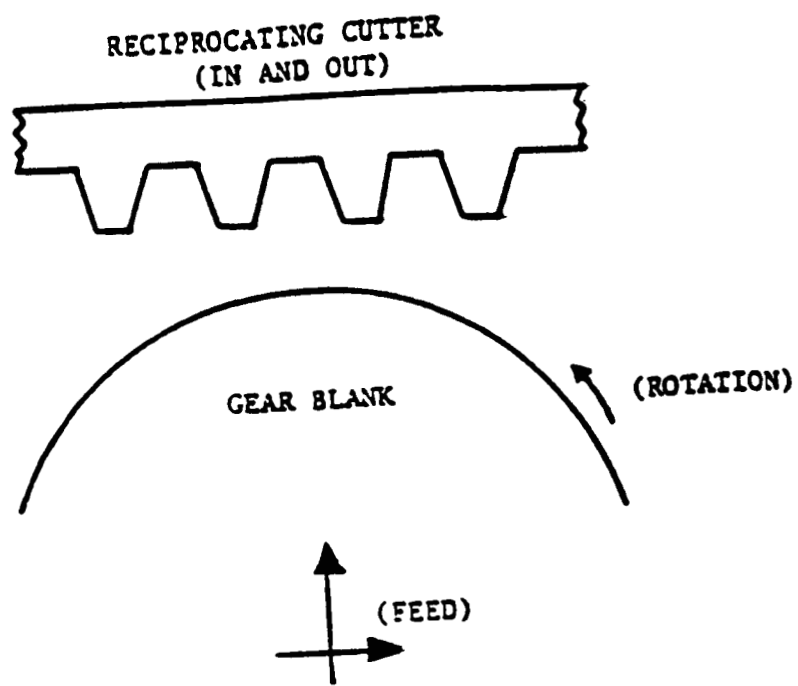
Reciprocating Rack Cutter and Gear Blank
